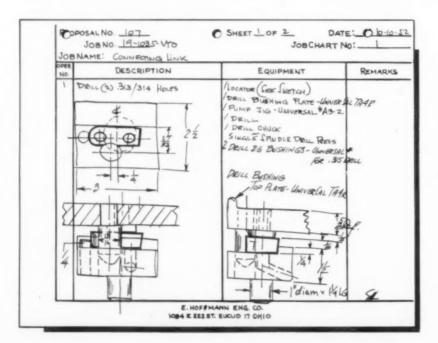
When the tooling is simple compared to the part, the tool diagram may be sketched on a part print.
